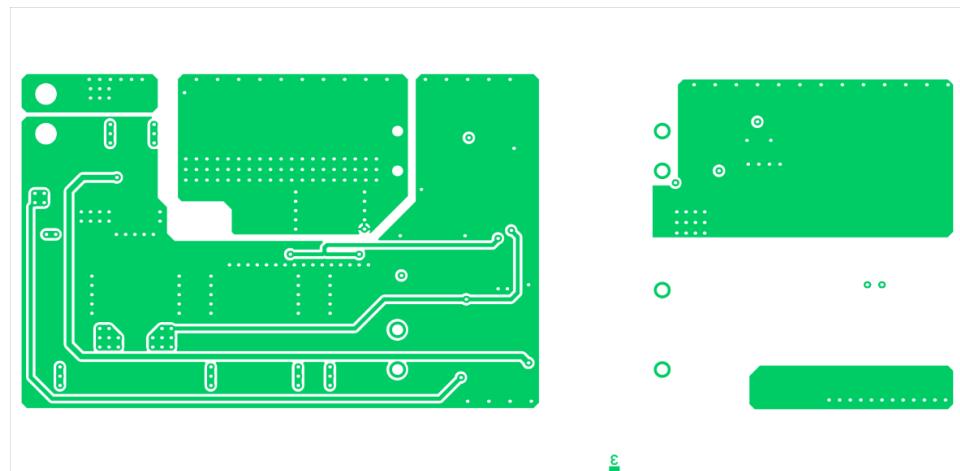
DER-1035Q Mid-Layer 3 PCB Layout.
